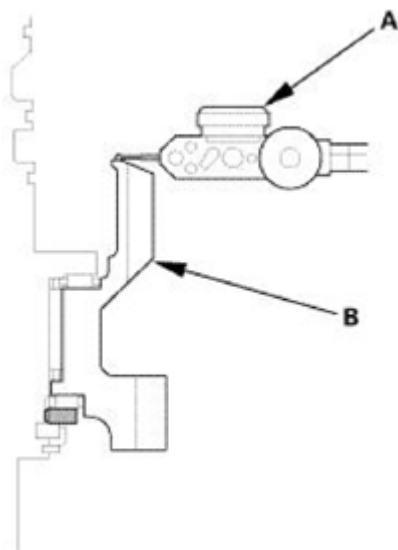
Identifying Secondary Shaft 2nd Gear Related Components
